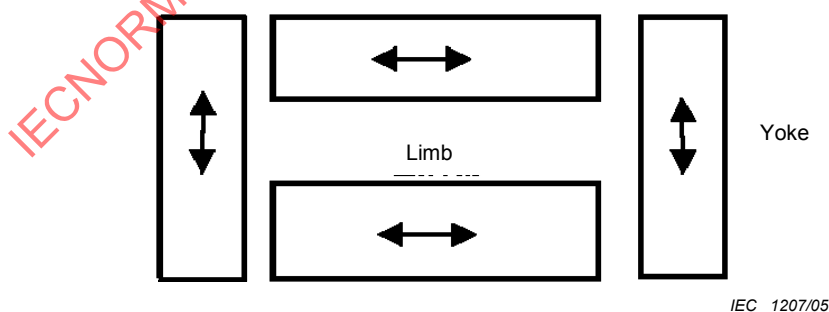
Layer plan for the lamination strip shapes Type YSUI 1
